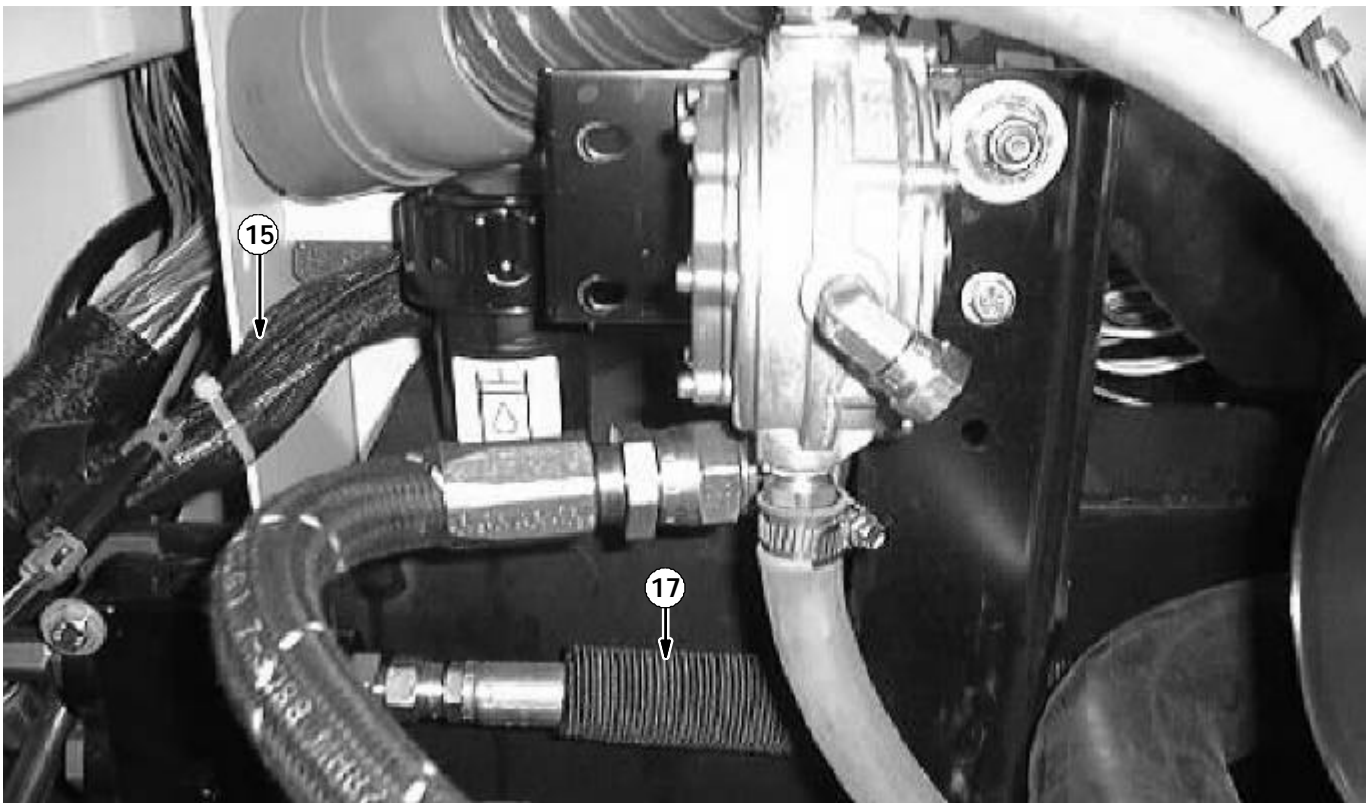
HYDRAULIC SLEEVE INSTALLATION
